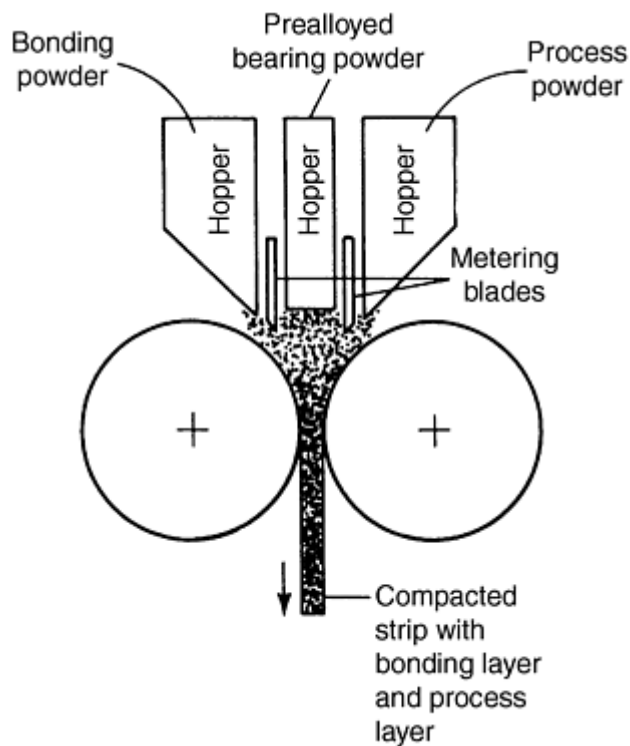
Rolling of strip for bearings. Using bonding powder, prealloyed bearing powder, and process powder
